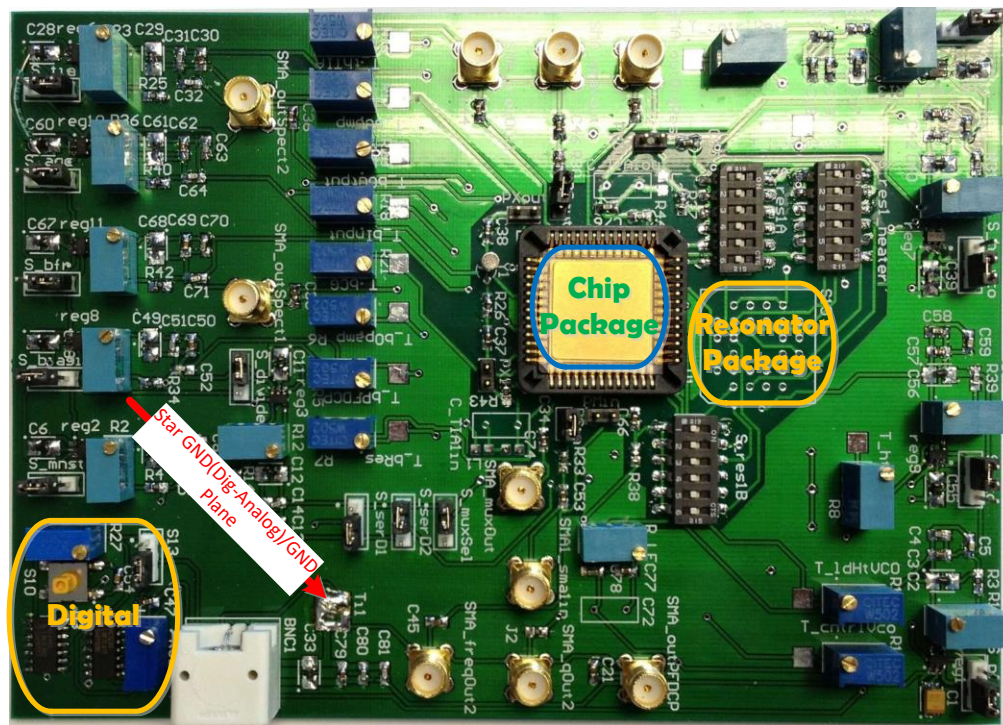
The PCB designed to test the compensation scheme using the fabricated chip.
